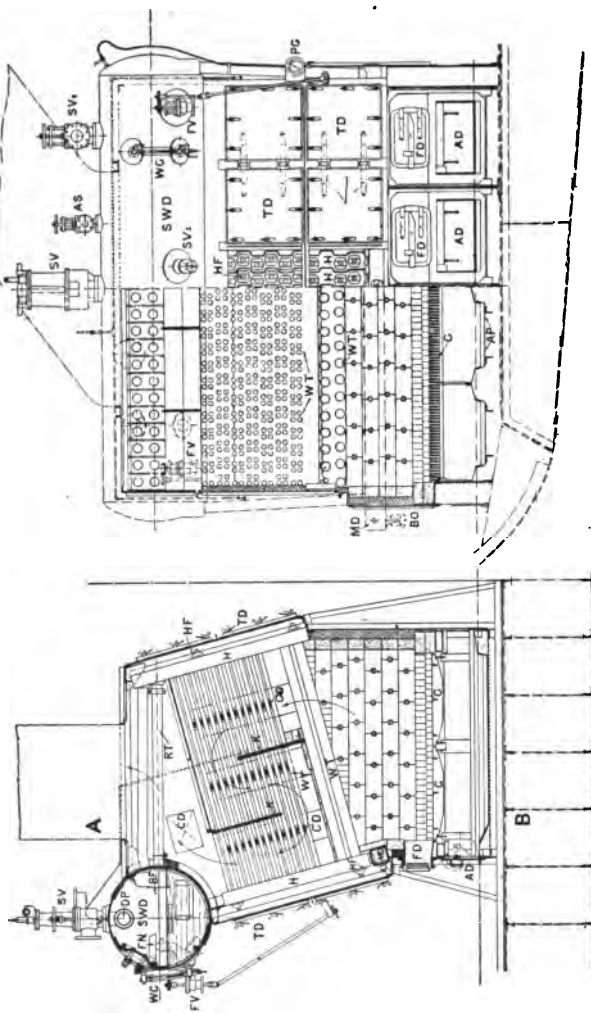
Longitudinal section and front elevation of Babcock & Wilcox marine-type boiler.
